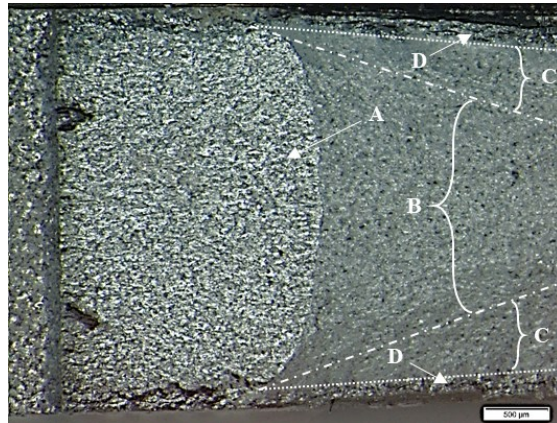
Optical micrograph showing the typical fracture surface of the EXCO-exposed specimens, with (A) the fatigue pre-crack, (B) the stable crack extension, (C) shear-lip (ductile) fracture, and (D) intergranular fracture.
